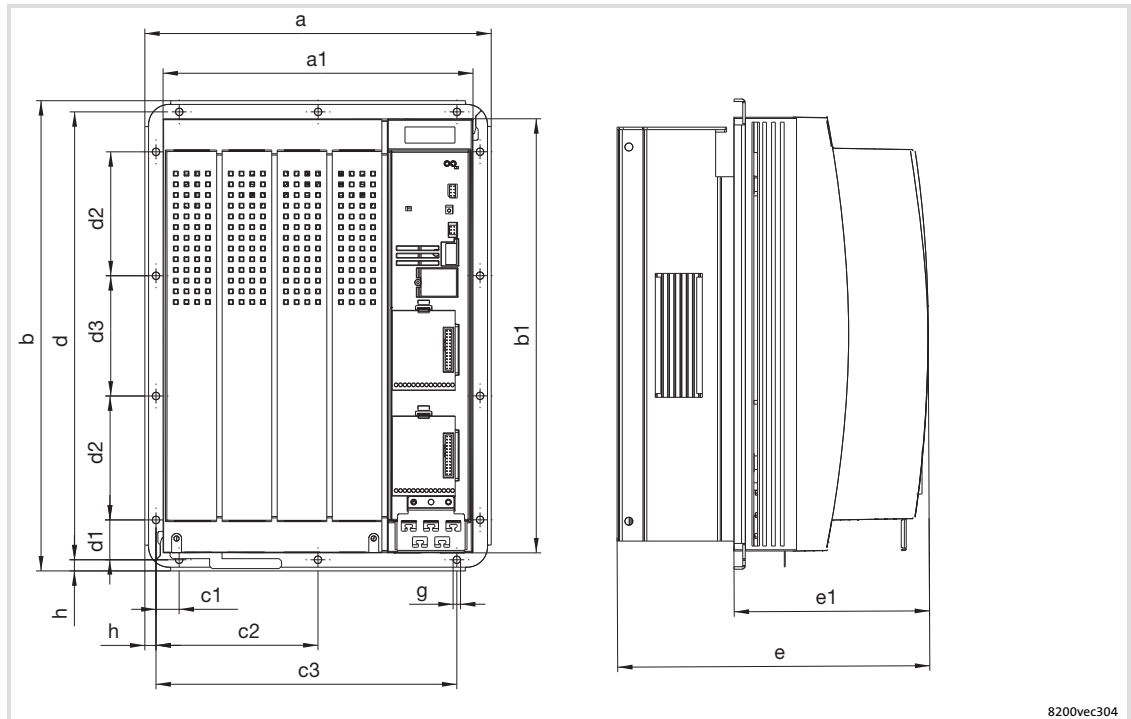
Dimensions for thermally separated mounting 15 ... 30 kW
